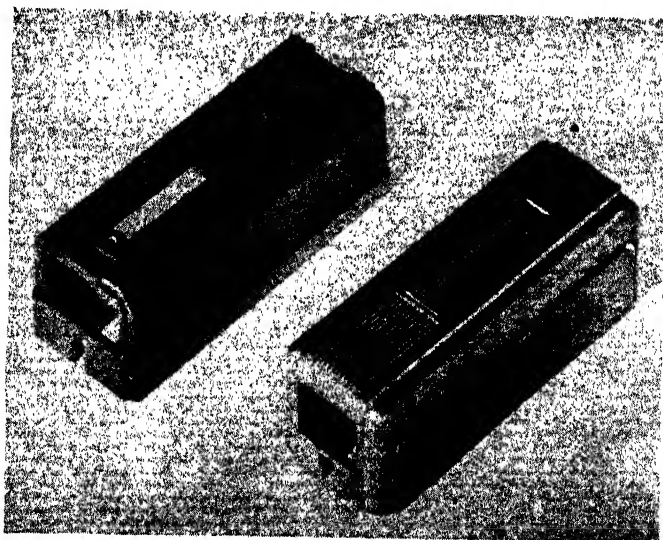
Thermostat housings as molded (*left*) and die cast. Parts are not exact duplicates but are nearly the same size. Both receive a spray finish. Die casting is stronger and thinner but weighs more and is not a dielectric.
